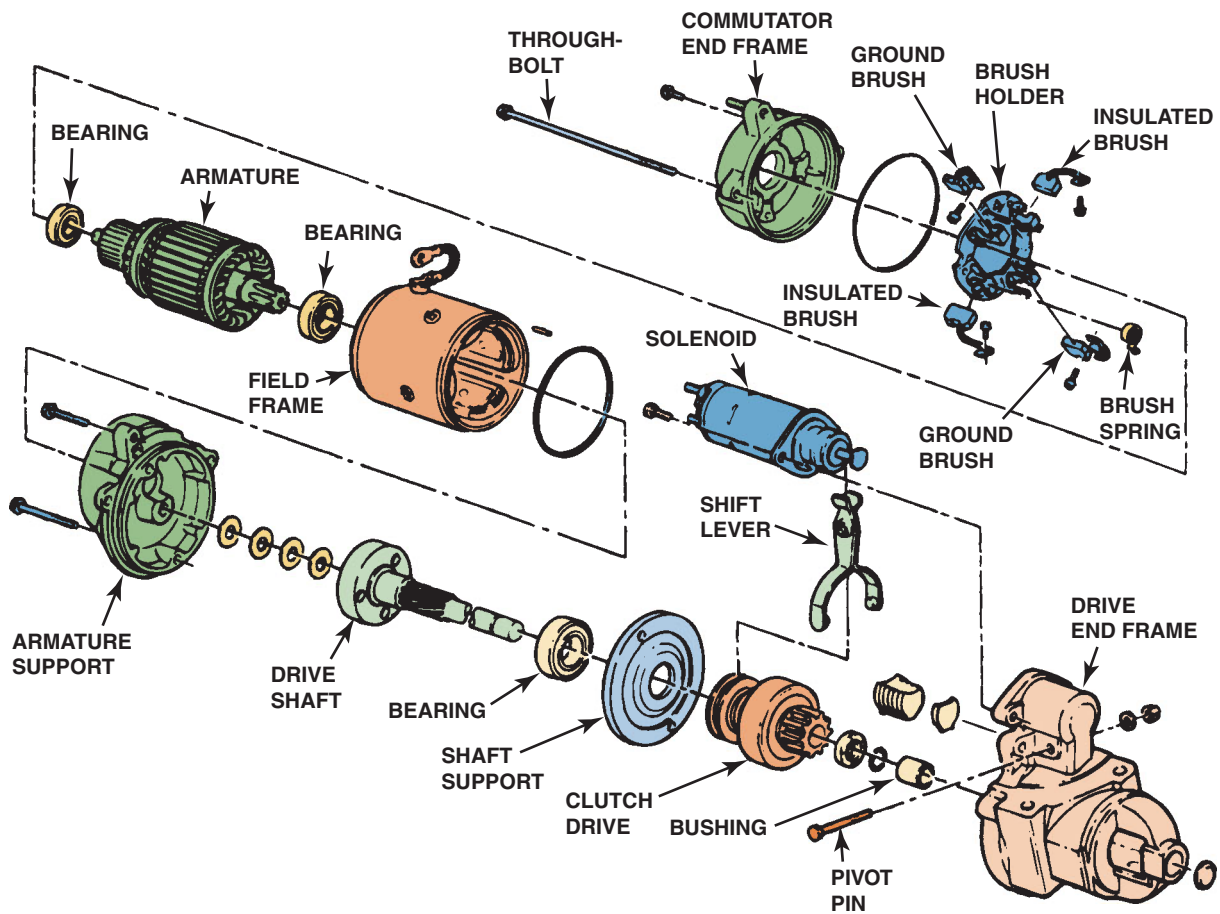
An exploded view of a typical solenoid-operated starter.
